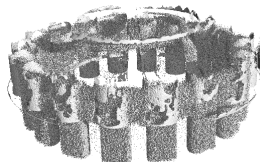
CT scan results for one end of the brazed rotor. The joints are porous.
